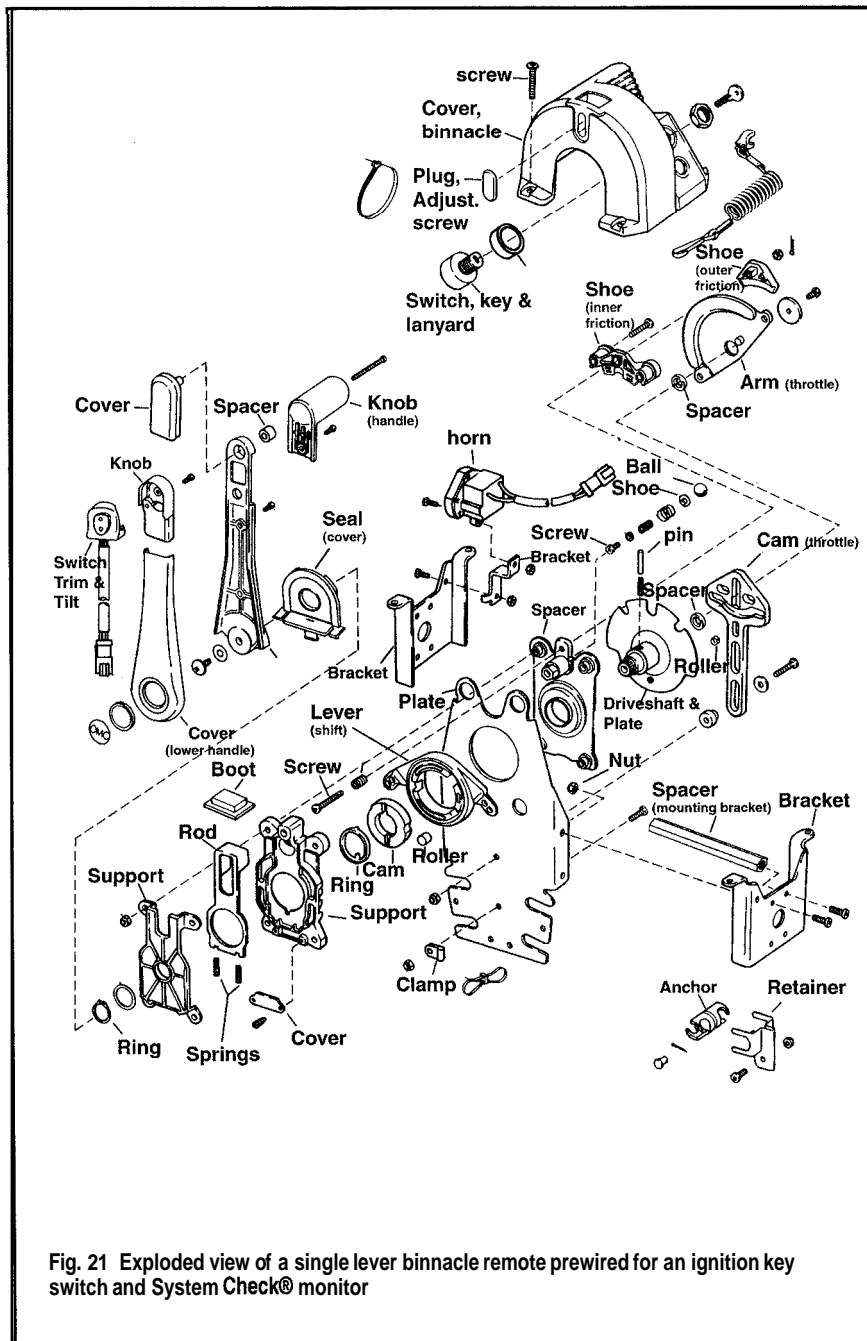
Exploded view of a single lever binnacle remote prewired for an ignition key switch and System Check® monitor
